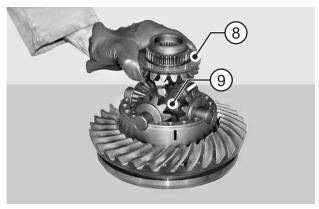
Fit the planetary gear set (9). Mount second planetary gear (8).
